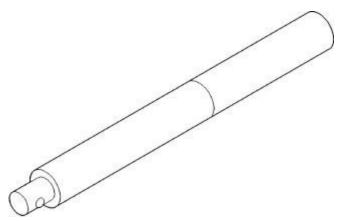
Driver Handle C-4171 Courtesy of CHRYSLER LLC
